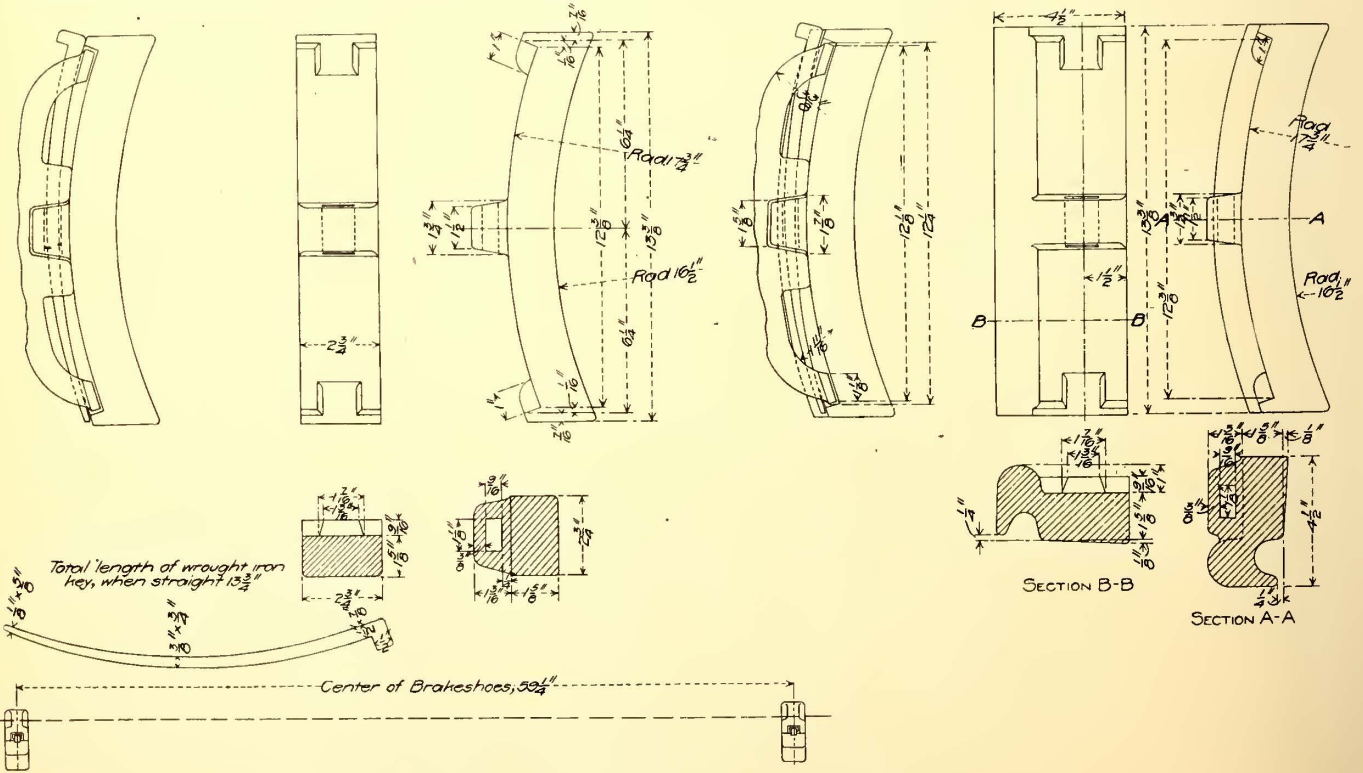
STANDARD BRAKE SHOES, BRAKE SHOE HEAD AND KEY
